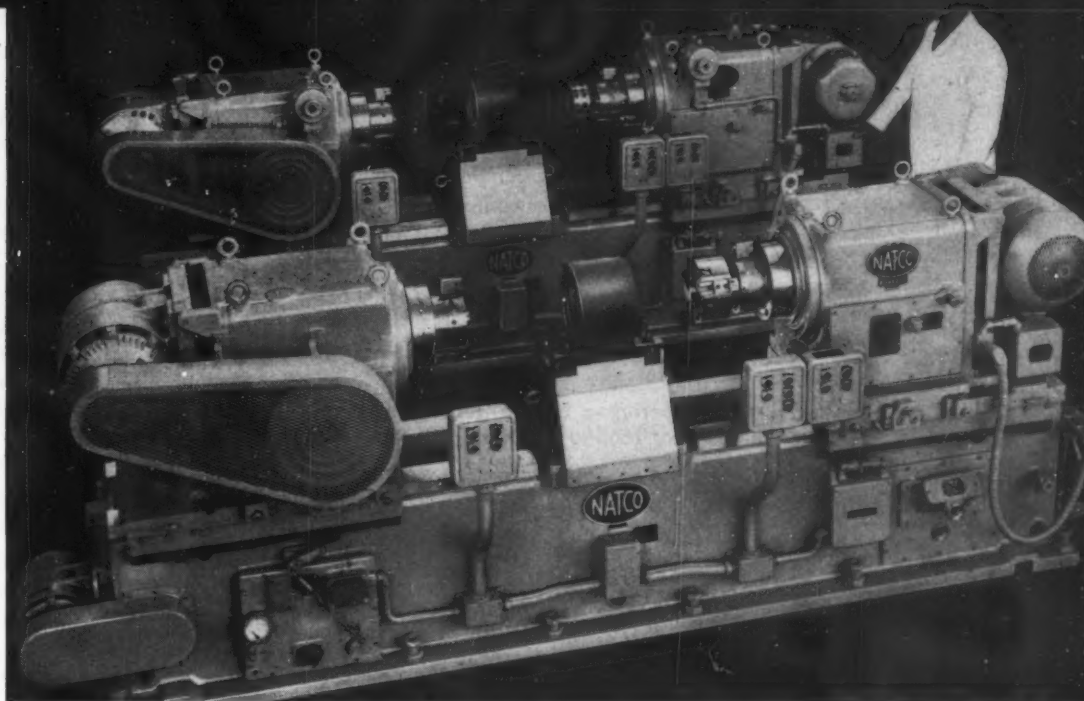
Right Center — Maximum production of precision bores is provided by special automatic boring machines. This gray iron housing requires but 43 seconds to complete the five bored holes,
